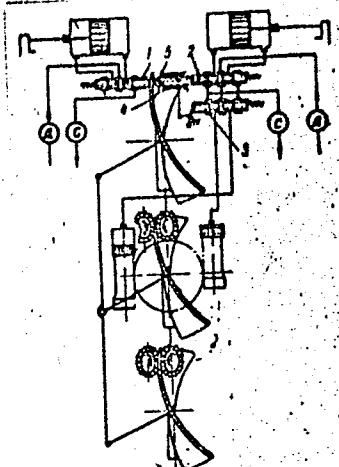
1-3--valves; 4 and 5--feeler rods
